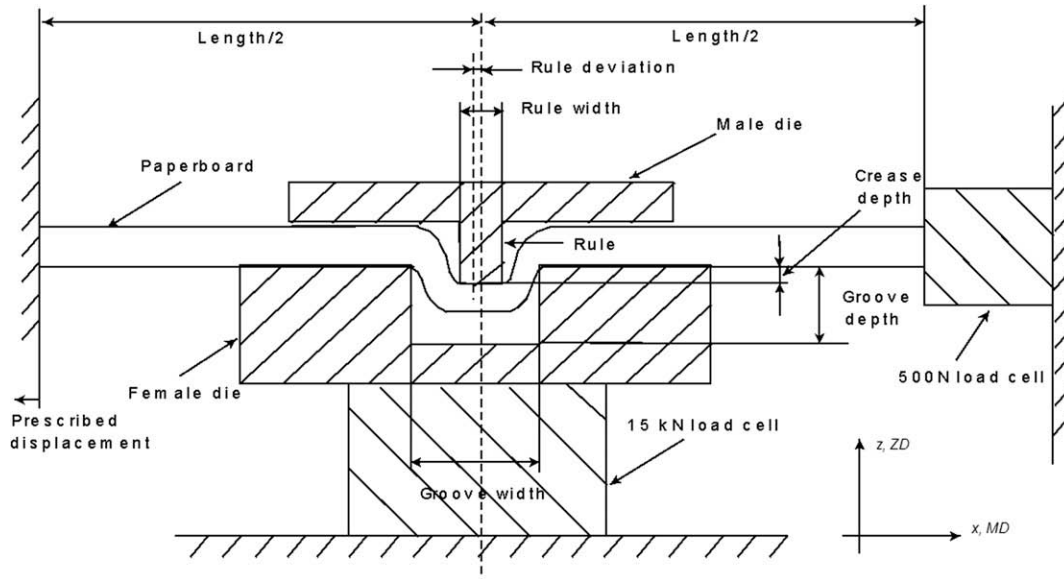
A principle 2 D-sketch of the creasing tool with load cells and boundary conditions for the mounted paperboard sample.
